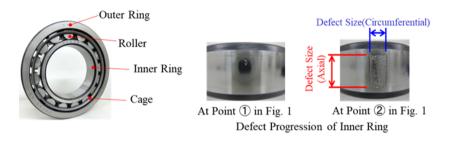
Overview of rolling bearing and defect shape on raceway surface of inner ring.
